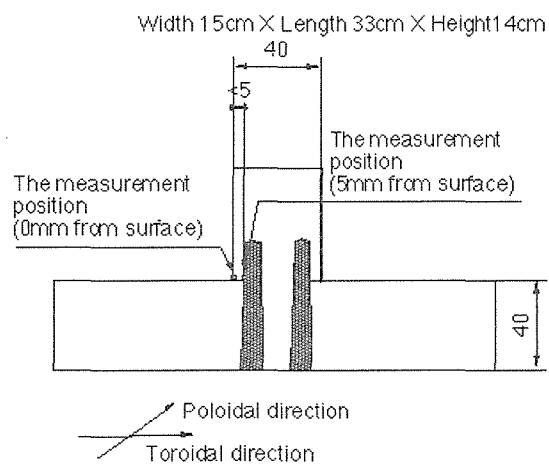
The configuration of weld specimens and the measurement positions.
